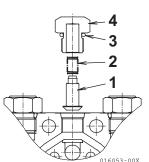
Check valve section (P.T.O. 1 and P.T.O. 2 Sections)
